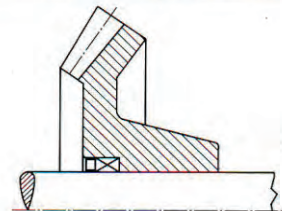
Bevel gear mounted using GSN 7012 locking assembly. The locking assembly transmits both the torque and the tooth pressure axial component.
